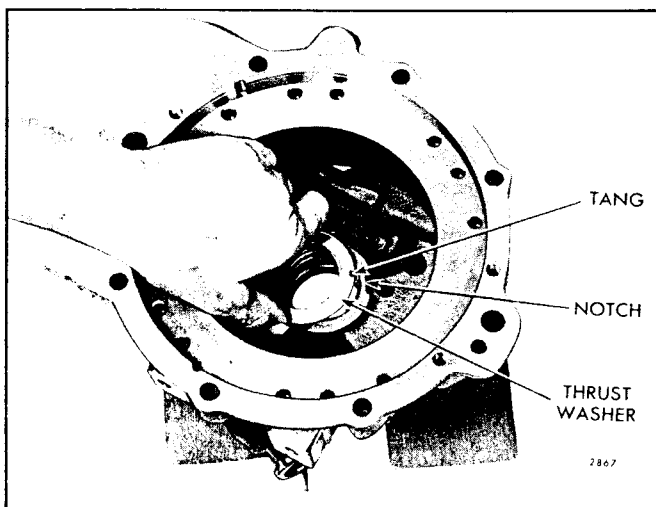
Installing Reduction Gear Input Shaft Thrust Washer in Gear Housing (1.5:1 and 2.1:1 Ratios)
